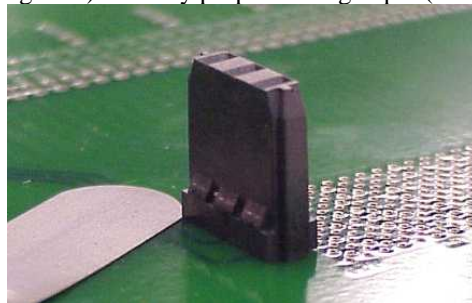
Verifying Proper Seating with Feeler Gauge Stock
